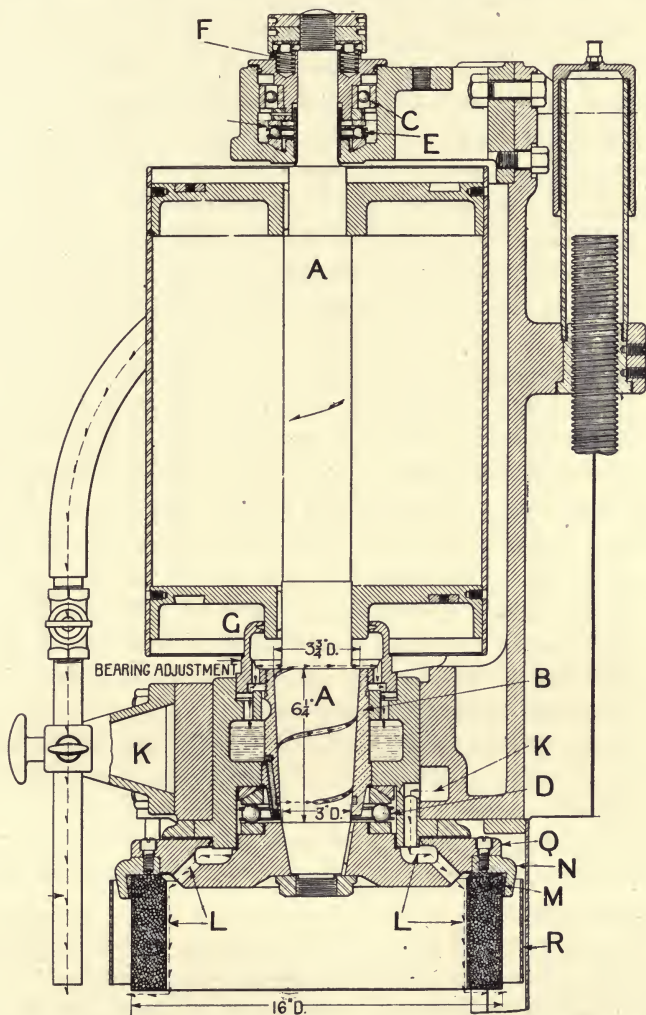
WHEEL HEAD OF BLANCHARD VERTICAL SURFACE GRINDER
